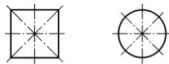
Measurement pattern for flatness of circular and rectilinear surfaces
